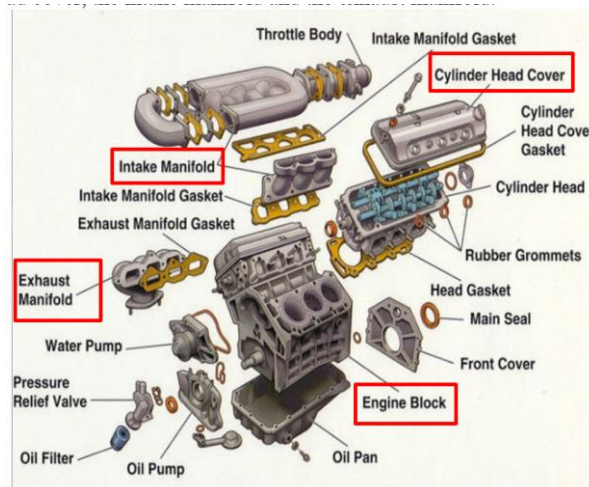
Exploded view of a car engine (adapted from Ref. 3).
